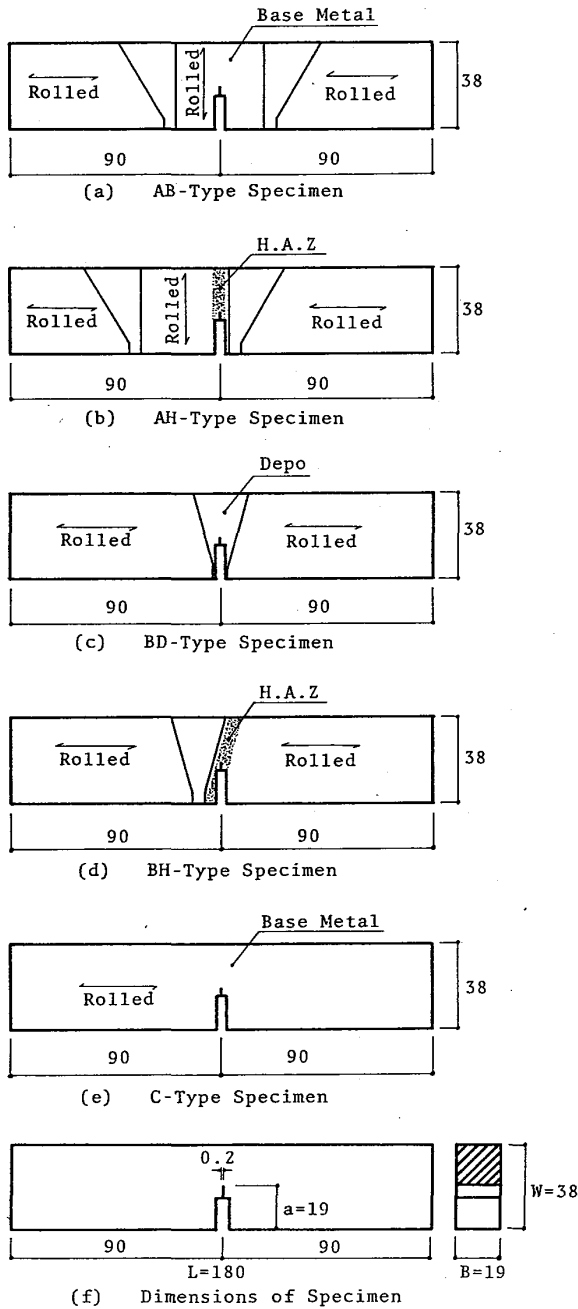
COD Test Specimens for Bending (Unit:mm)
